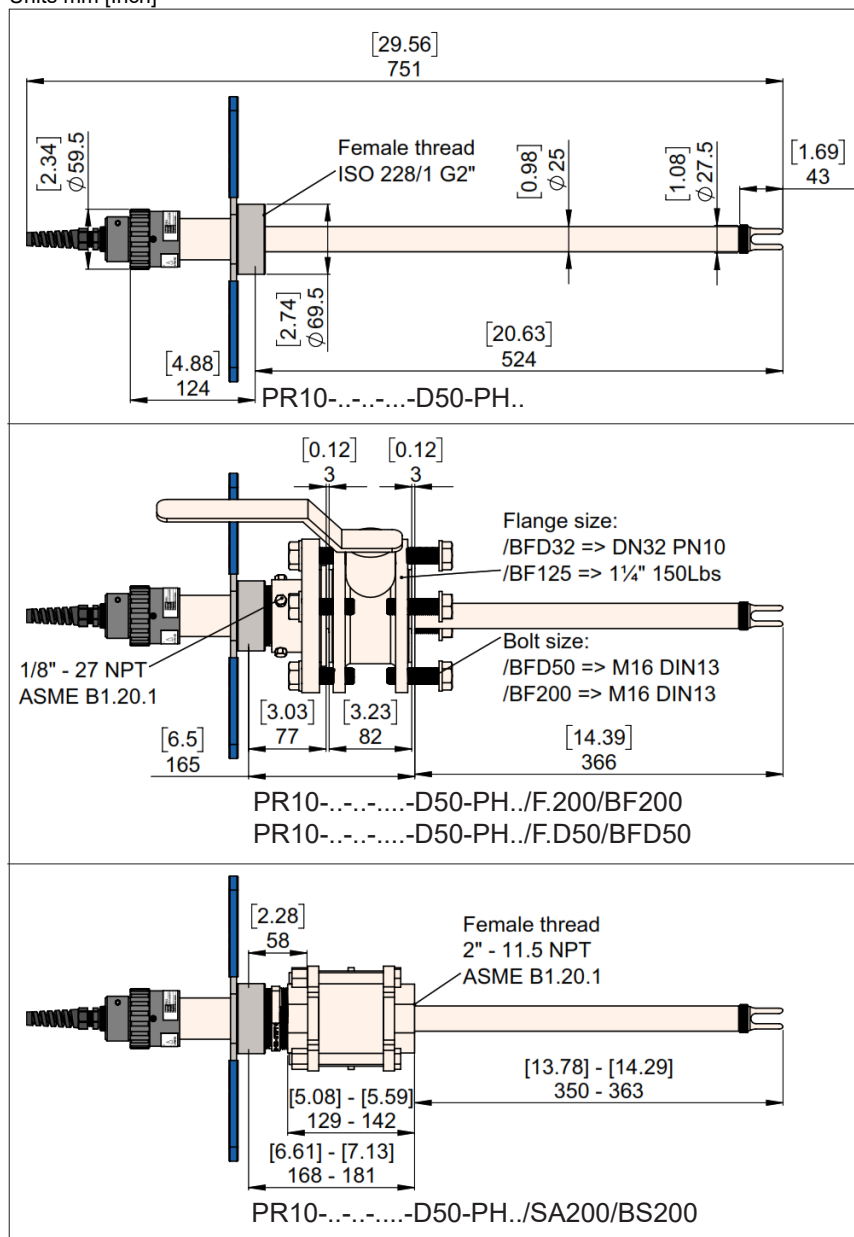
Dimensional drawing PR10...-D50 with mounted pH sensor
